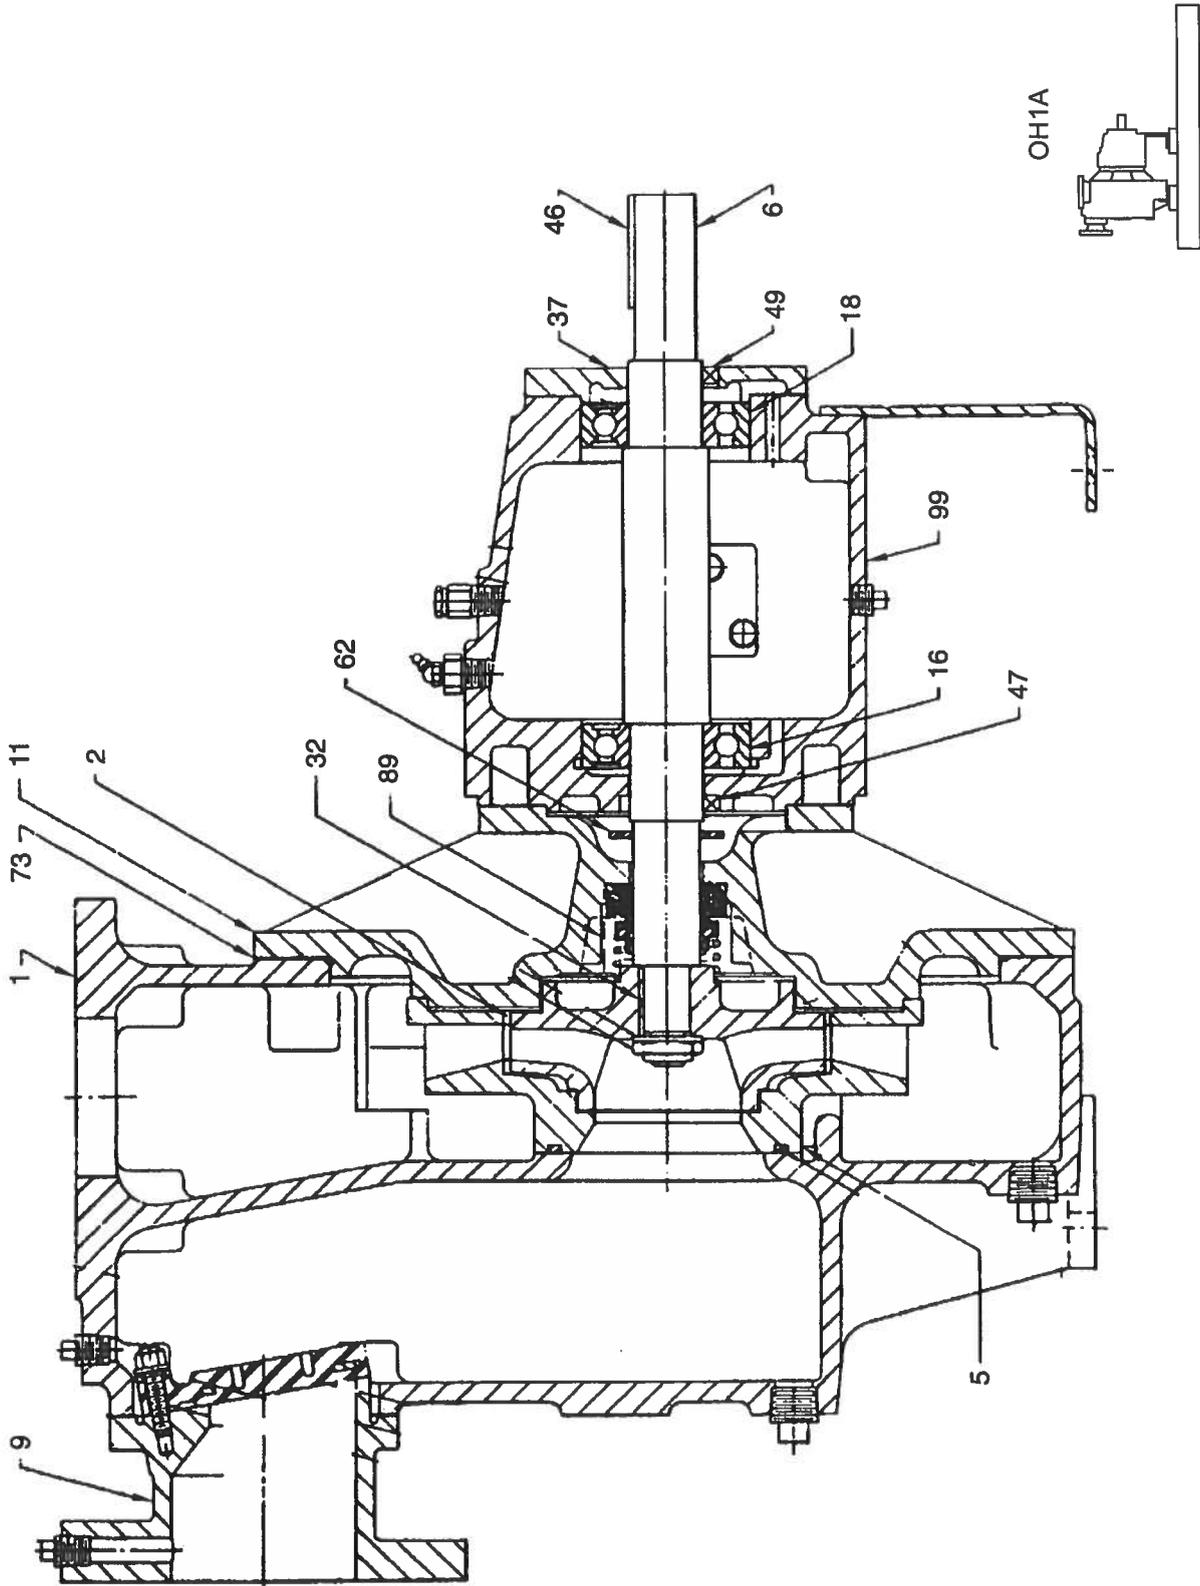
Overhung impeller – flexibly coupled – single stage – foot mounted – self-priming
